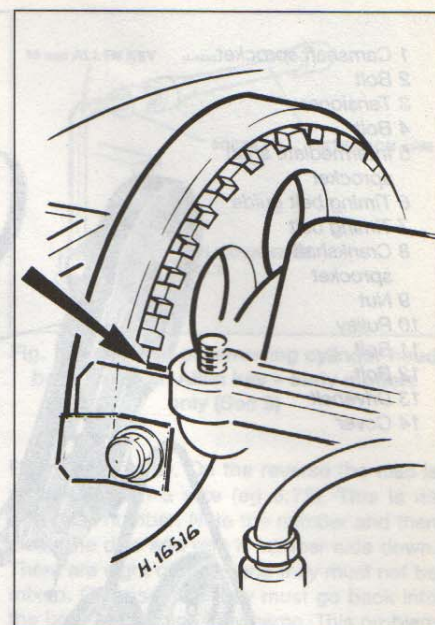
Camshaft sprocket timing mark (arrowed) with No 1 cylinder at TDC on compression (Sec 8)
